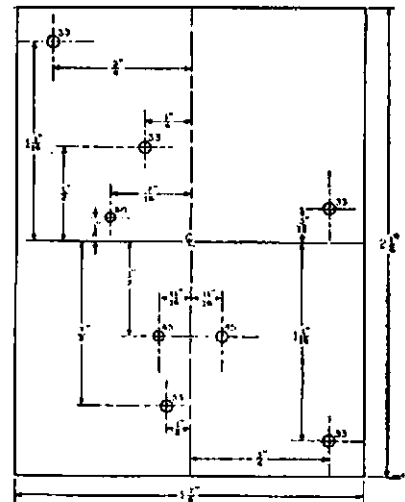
Drilling details on the circuit board chassis. The board is  $\frac{1}{16}$  inch thick and preferably with copper on both sides. If just one side is copper, drill as shown from the copper side. The numbers by the side of each hole indicate the drill gauge.
